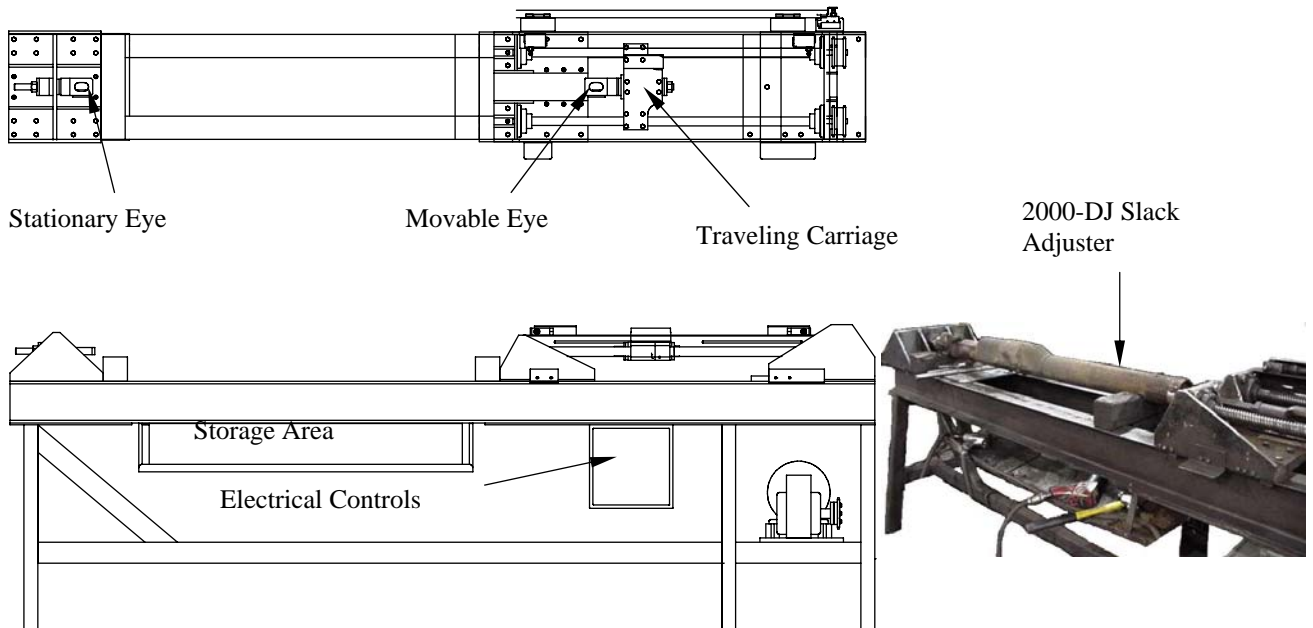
2000-DJ Slack Adjuster Disassembly Fixture
